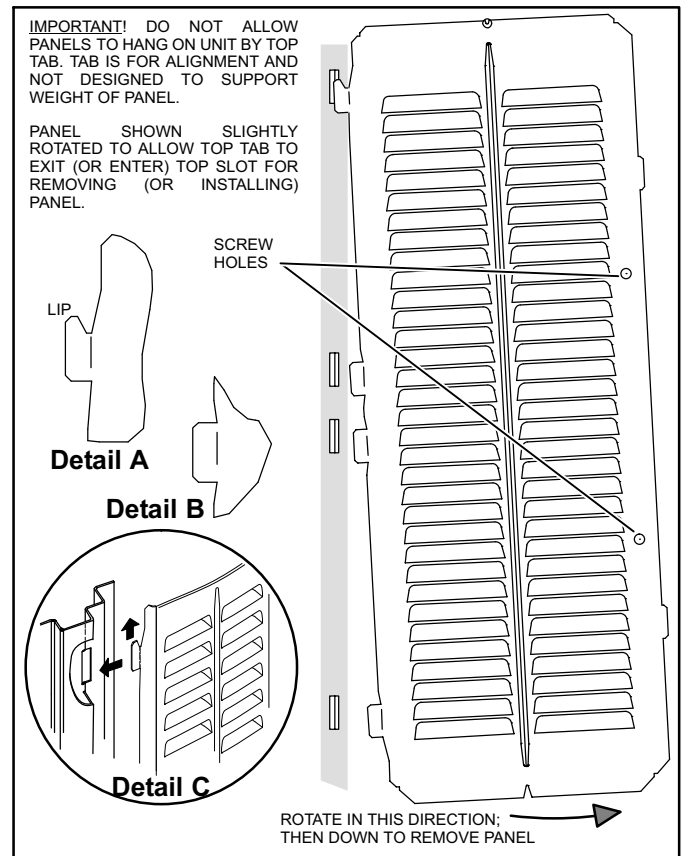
Removing/Installing Louvered Panels (Detail A, B and C)
